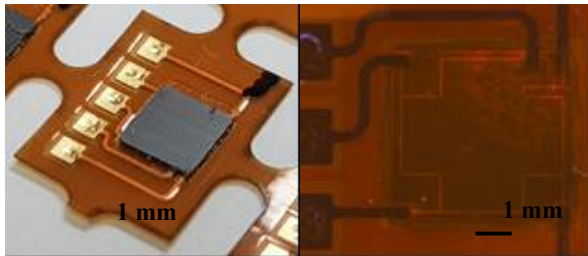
ACF FC bonded die top angle (left) and backside view (right).
